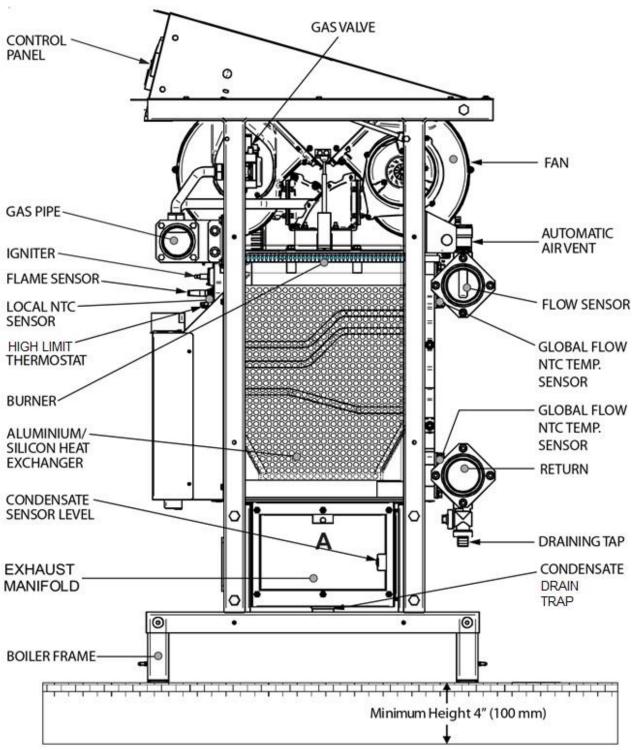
MODULEX EXT Main Components (Right Side View) (EXT 450 2S - 1100 2S))
